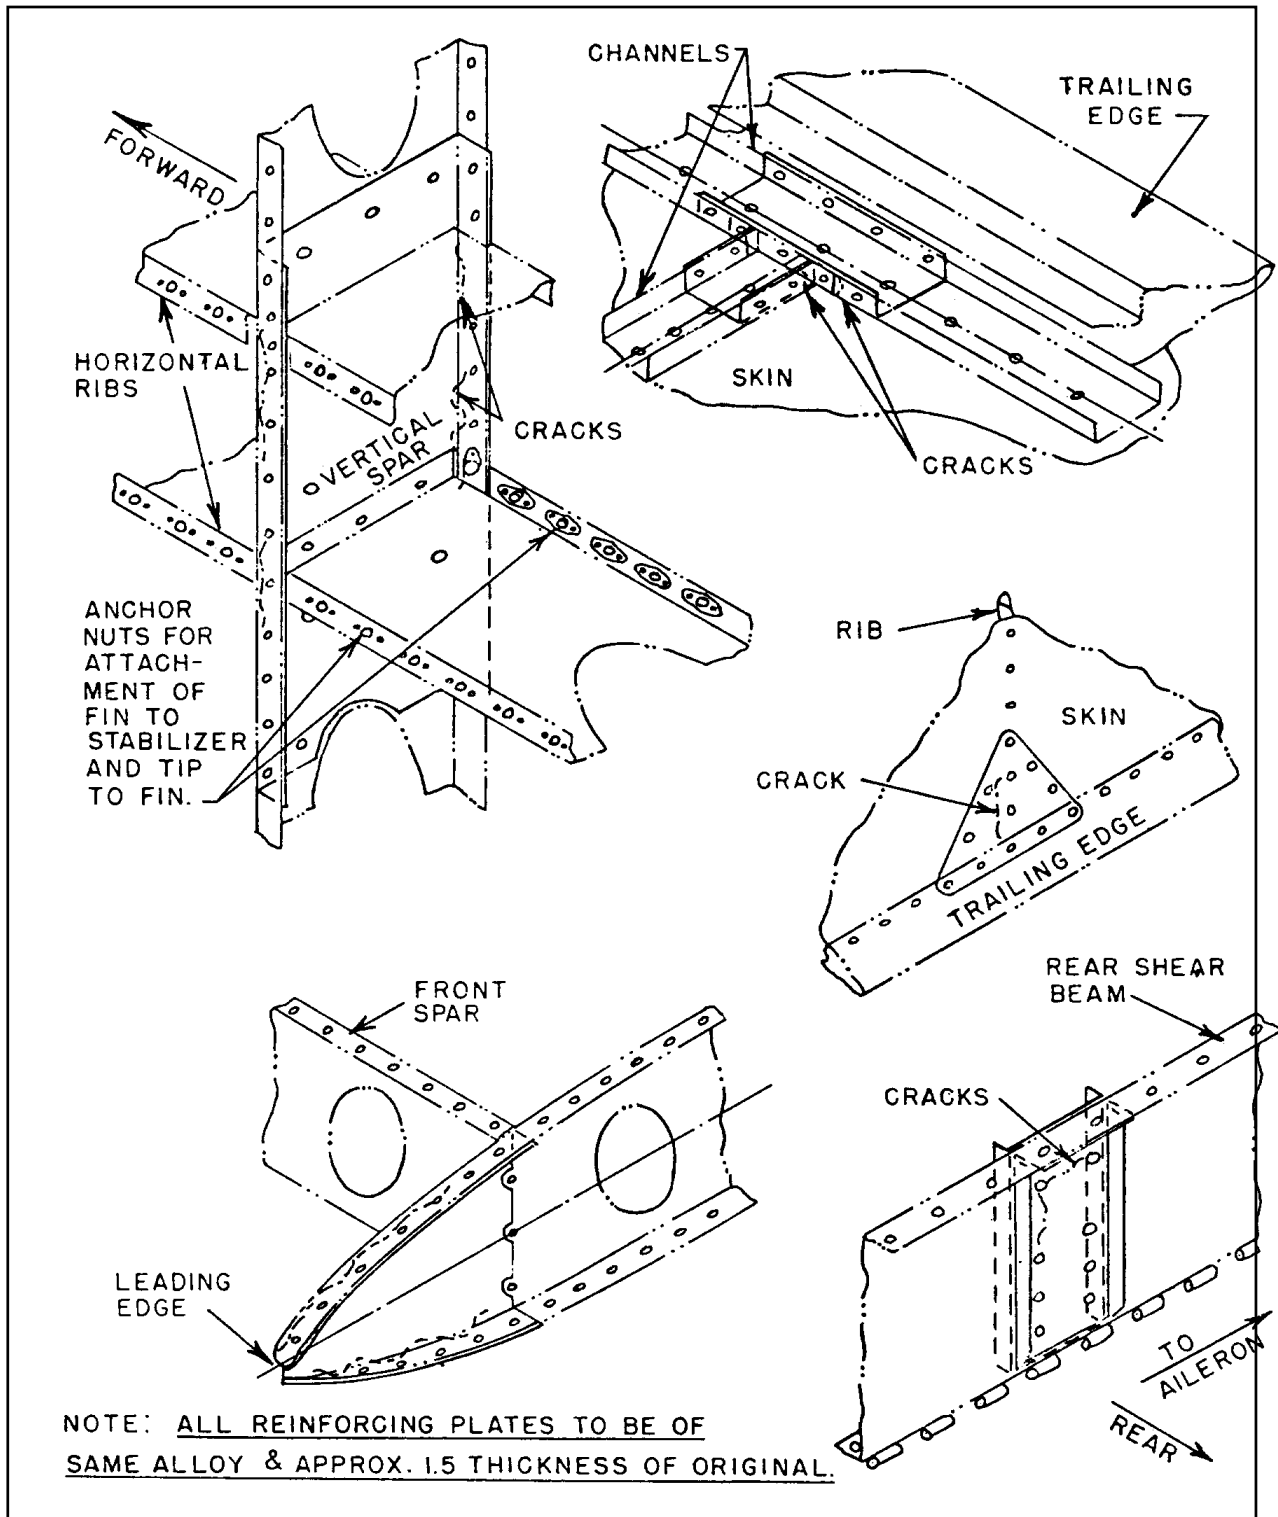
Typical methods of repairing cracked leading and trailing edges and rib intersections.
